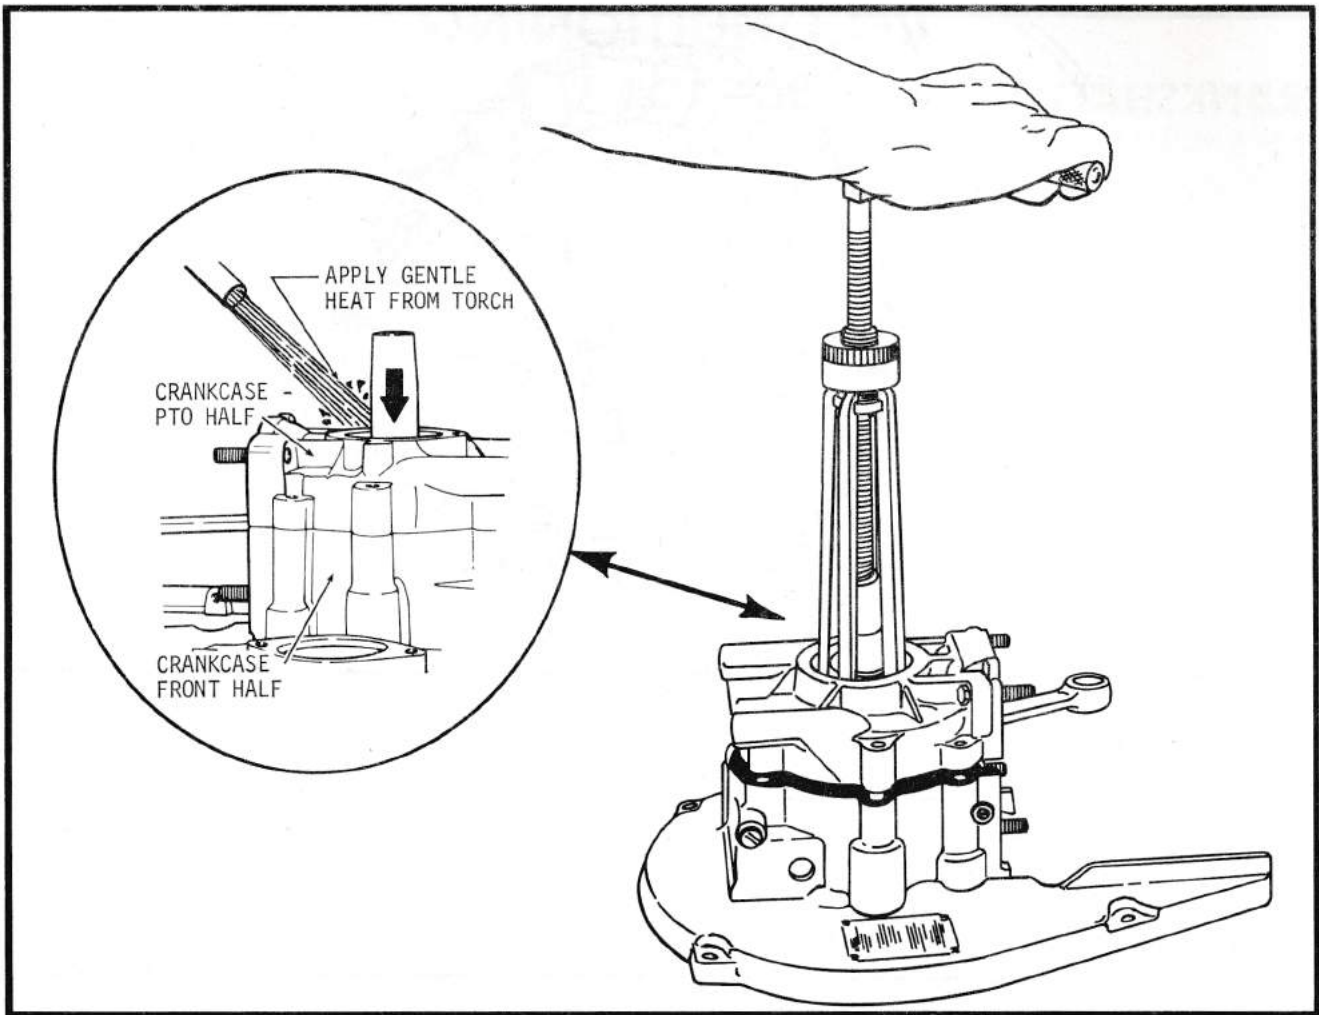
USE BEARING PULLER TOOL AND HEAT TO SEPARATE CRANKCASE HALVES.
